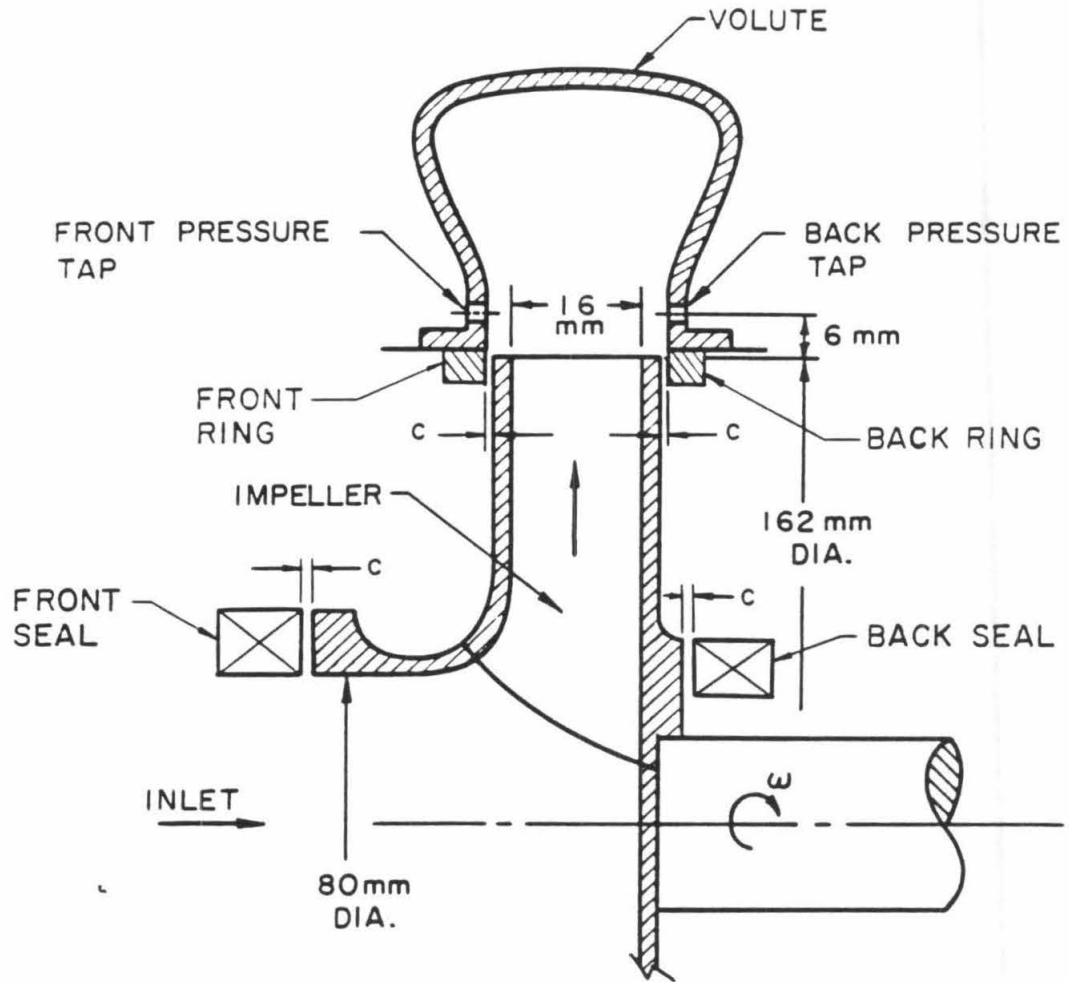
Schematic of volute A and impeller X showing main dimensions, static pressure measurement points within the volute (front: 11 taps, back: 11 taps), impeller face seals, and leakage limiting rings at impeller discharge.
